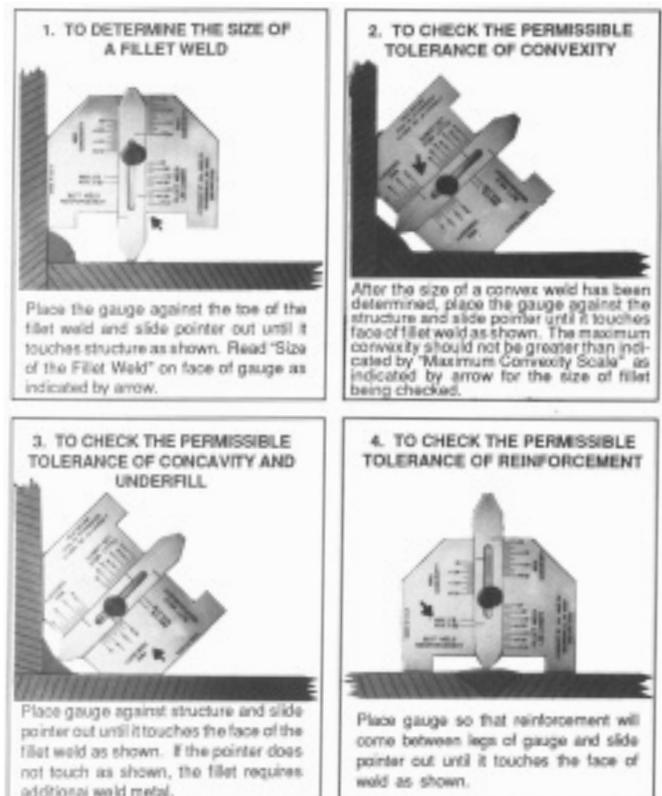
Directions for using an automatic weld size gauge to determine fillet weld size; permissible tolerance of convexity, concavity, and underfill; and permissible tolerance of reinforcement.
